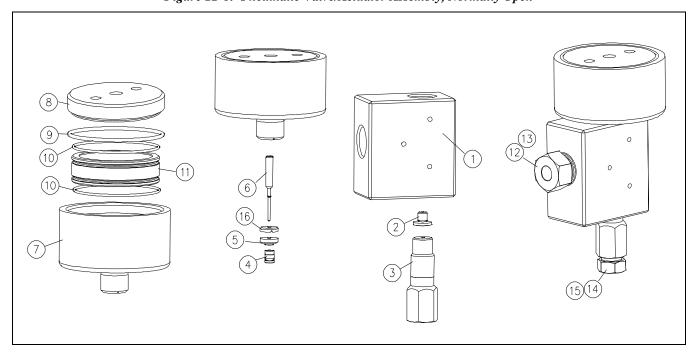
Pneumatic Valve/Actuator Assembly, Normally Open
